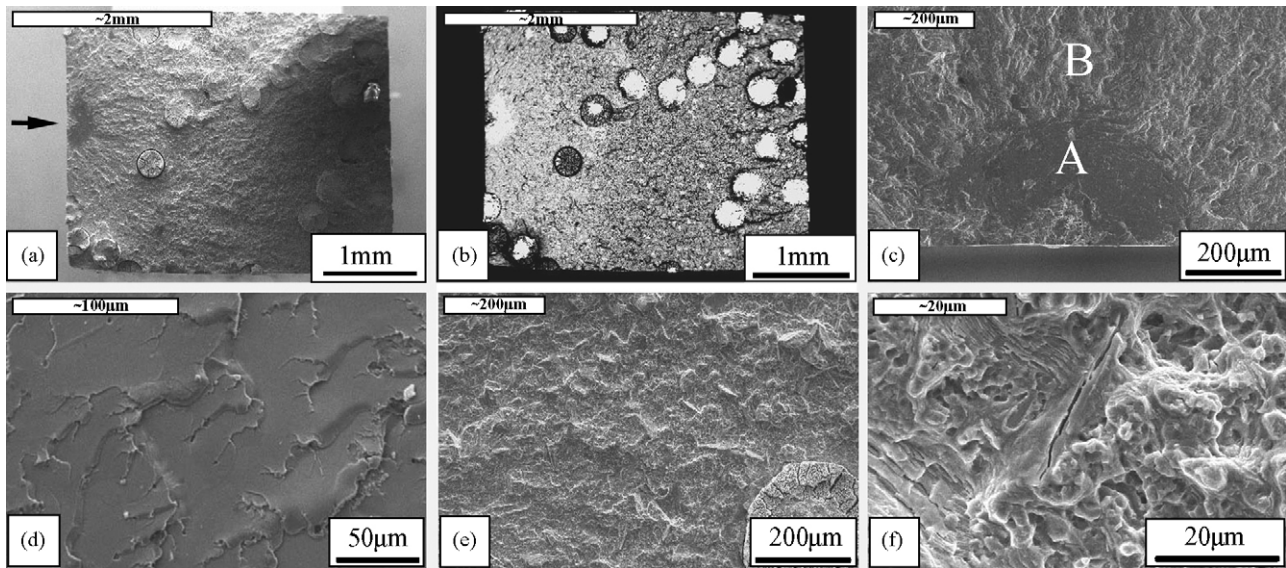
Scanning electron micrographs of the fractures surface for the composite with 18 vol% tungsten fiber. Macroscopic fatigue fractography observed by SEM (a) and back scatter image (b); (c) fatigue crack initiated from a surface flaw of the glass matrix; (d) relatively flat region adjacent to crack initiation site; (e) fatigue crack propagation region; (f) higher magnification image of region B in 'c', showing a local cracking in the crystalline phase.
